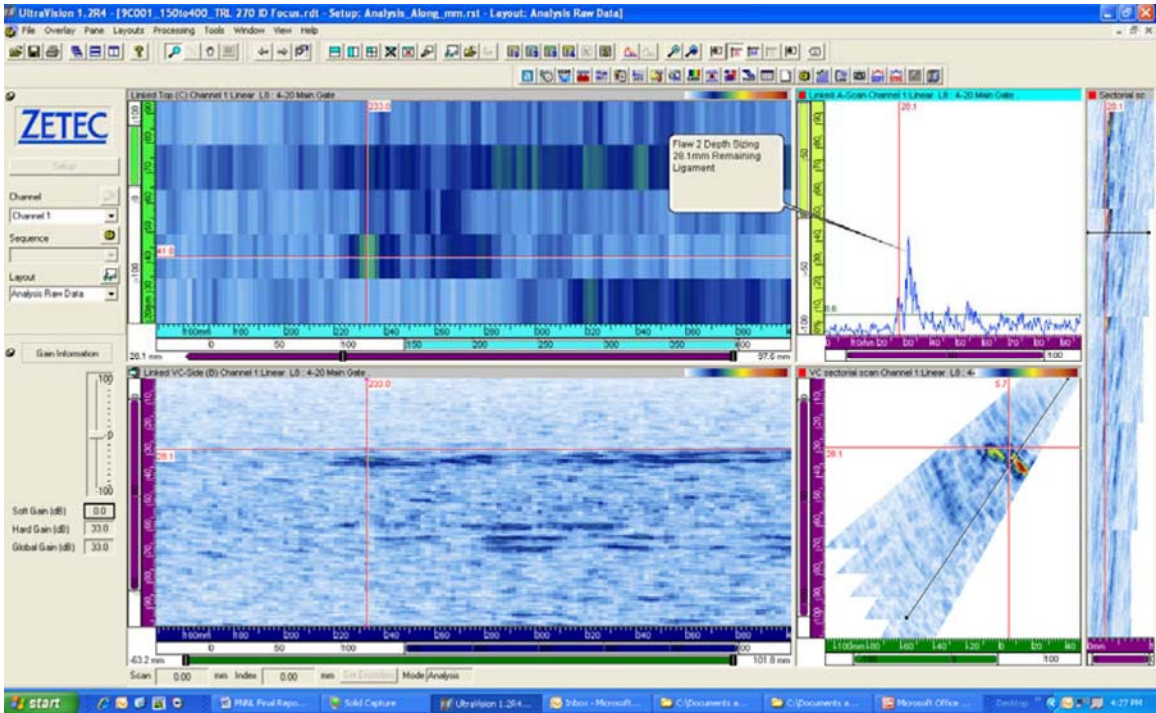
9C-001 Implanted Flaw 2 from the CCSS Pipe Side for Depth Sizing
